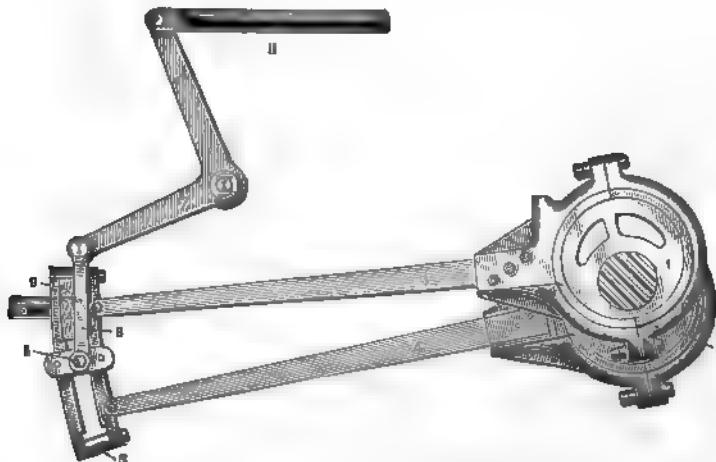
Diagram of the Link Motion and Eccentric Gear of a Steam Engine. The parts shown are (1) backward eccentric; (2) forward eccentric; (3-4) eccentric rods; (5) slotted shifting link; (6) link hanger; (7) reversing arm; (8) link saddle pin; (9) link block; (10) valve stem; (11) reach rod. The position shown in the cut indicates that the backward eccentric is in gear which gives a reverse motion to the engine.
